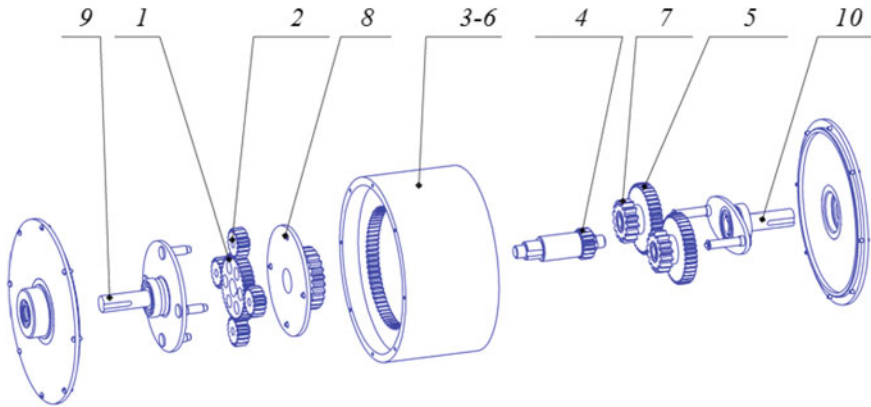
Spatial image of adaptive transmission parts. 9—input carrier, 2—input satellite, 1—4—block of solar wheels, 8—toothed wheel of doubling transfer 8-7 with a disk affiliated to the carrier 9, 3-6—block ring wheels, 4—solar wheel with the shaft to which the solar wheel 1 is affiliated, 7—toothed wheel of doubling transfer 8-7, 5—output satellite in the block with a wheel 7 of doubling transfers, 10—output carrier
